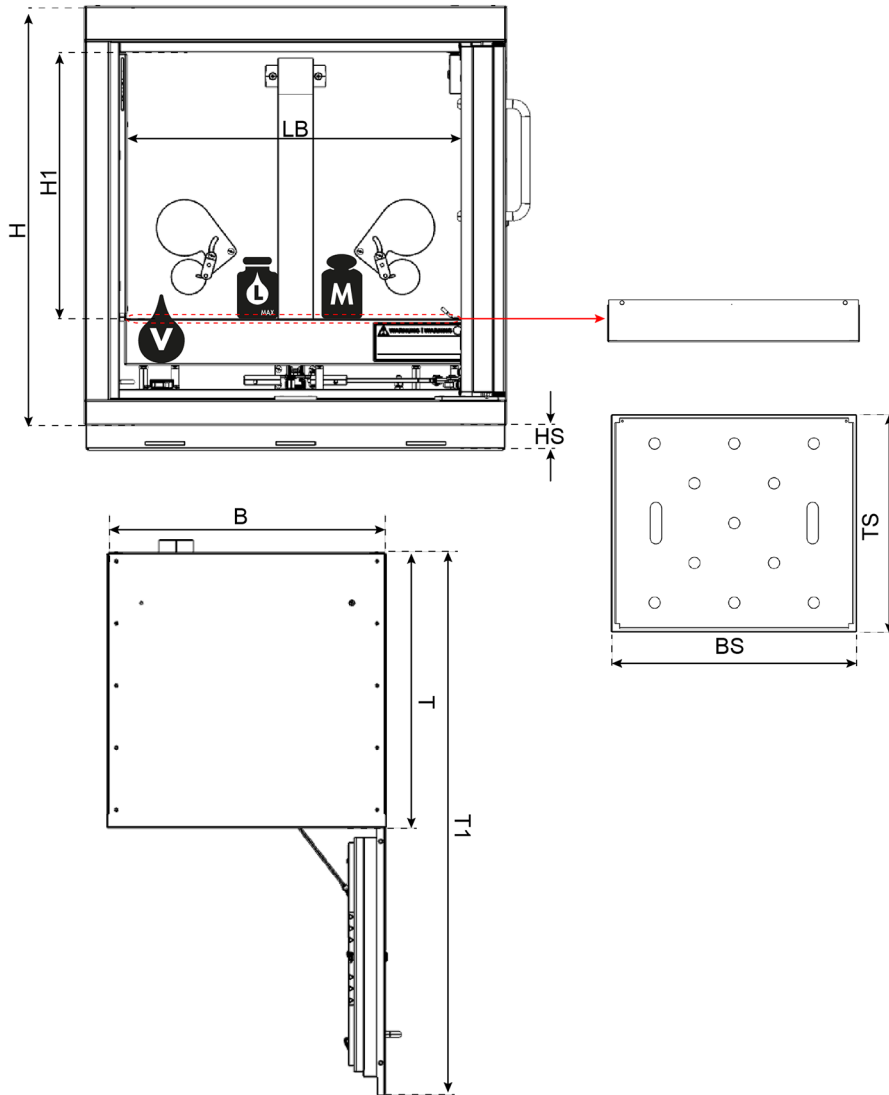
UTS standard cabinet series with bottom tray dimensions
